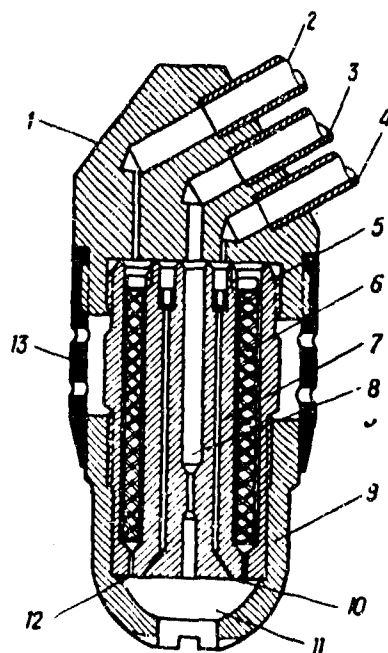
Cross Section of Head to BUPR Cutter: 1 - frame; 2 - gasoline supply pipe; 3 - pipe for delivering the cutting oxygen; 4 - pipe for heating oxygen; 5 - wire washer; 6 - gasoline-control rods; 7 - atomizer; 8 - central channel; 9 - nozzle; 10 - outlet holes for oxygen; 11 - mixing chamber; 12 - outlet openings (orifices) for gasoline; and 13 - cooling ring.
